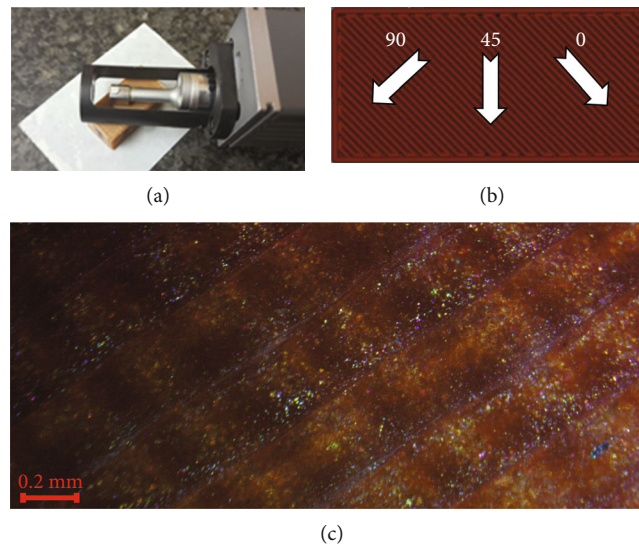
Measuring process of the top layer of printed workpieces. (a) Ra-90 measuring process, (b) measuring orientation related to printing lines of the top face, and (c) the surface of workpiece number one scanned by optical microscope.
